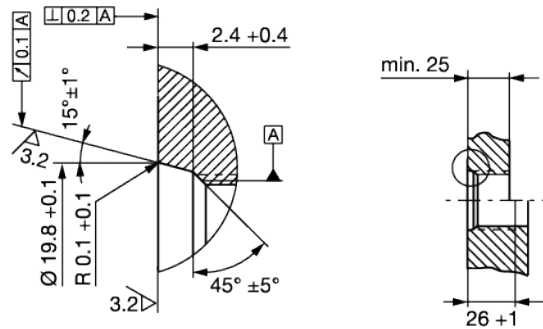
Mounting hole M18×1.5 according to ISO 6149 O-Ring 15.4×2.1
